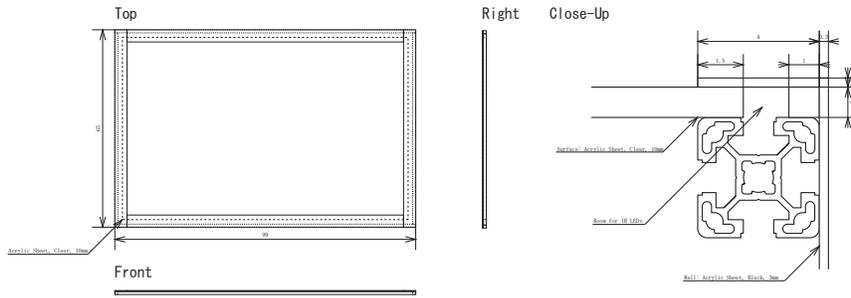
Drawing of frame with camera, projector, and IR mounts
